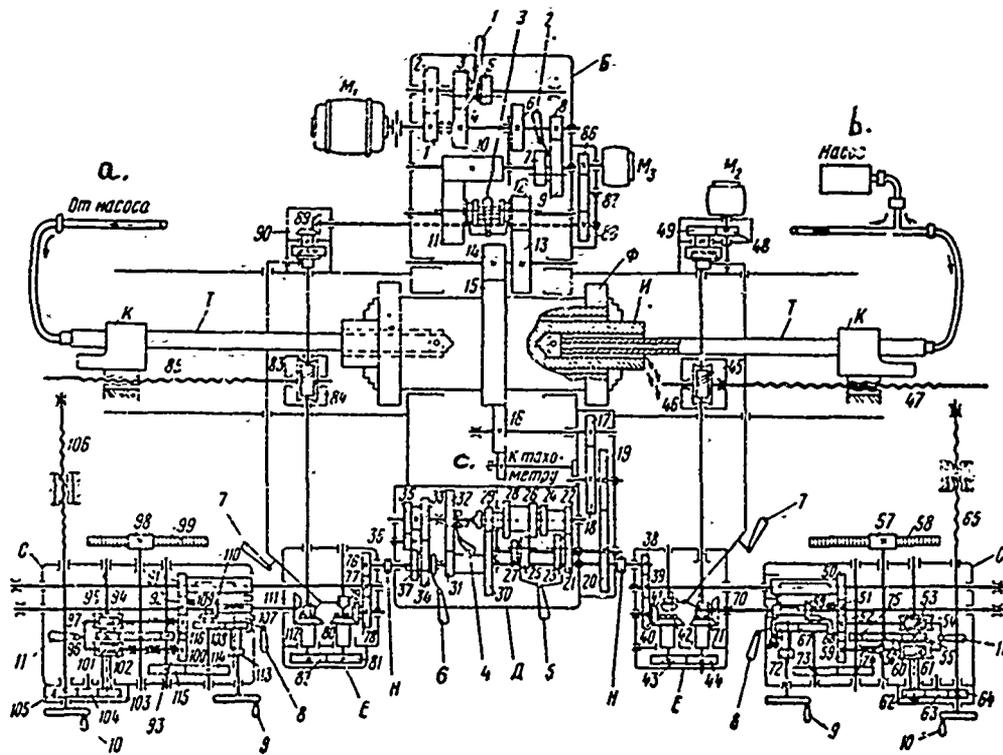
Kinematic layout of two-sided horizontal drilling and boring machine -- 3 (letters, positions according to Fig. 115; numbers, gear numbers; M_1 and M_2 , electric motors)
